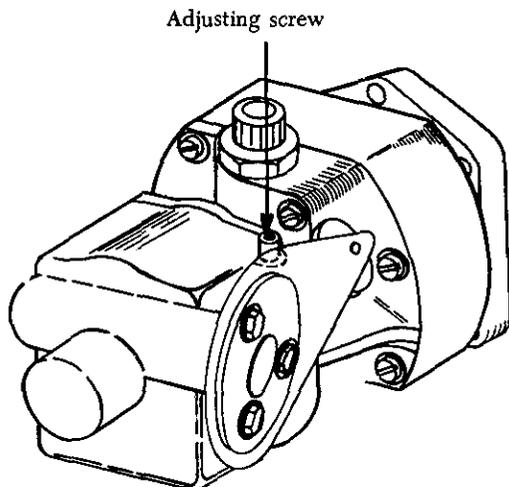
Propeller r.p.m. adjusting screw.
